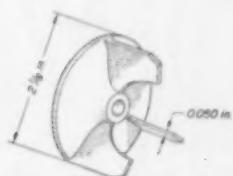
Plunger Guide Made of 380 for Which Die Casting Was Selected Because Sections Had to Be Thinner than Could Be Cast in a Permanent Mold
